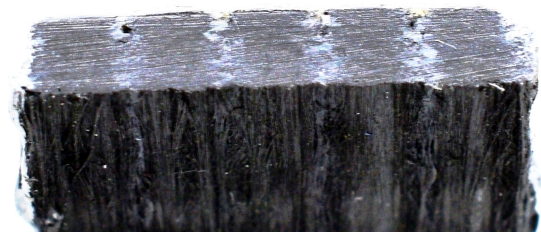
Cross-sectional view of a plastic deformed specimen
